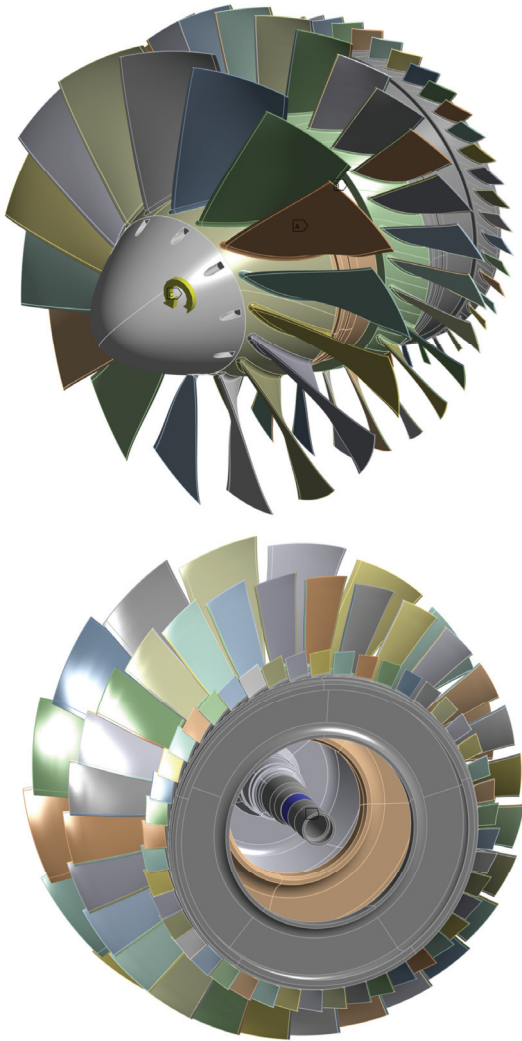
Initial design of a fan assembly for an aircraft turbofan engine
